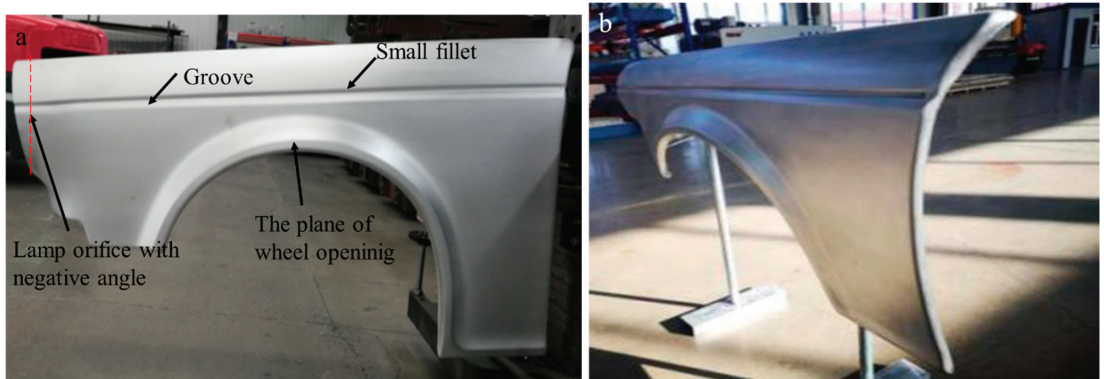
Front automobile fender: (a) elevation view; (b) side view.
